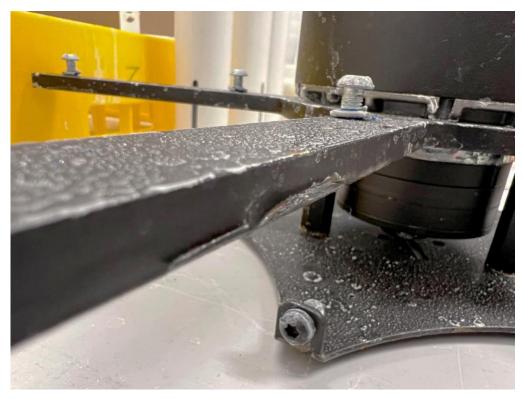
Visual inspection (fan). Corrosion and peeling of coating.
